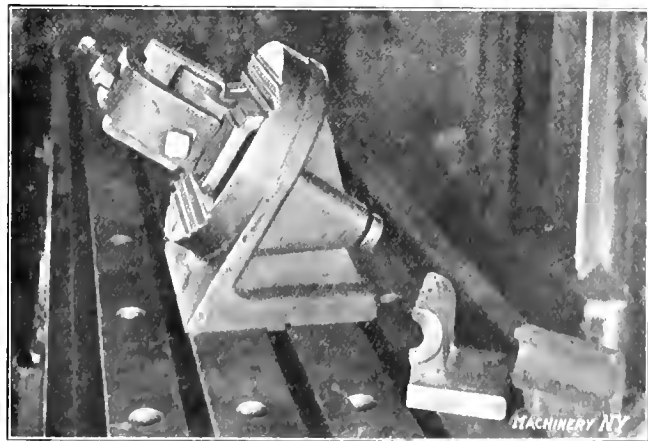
Fixture for Milling Dove-tail Bevel on Apron Half-nuts
